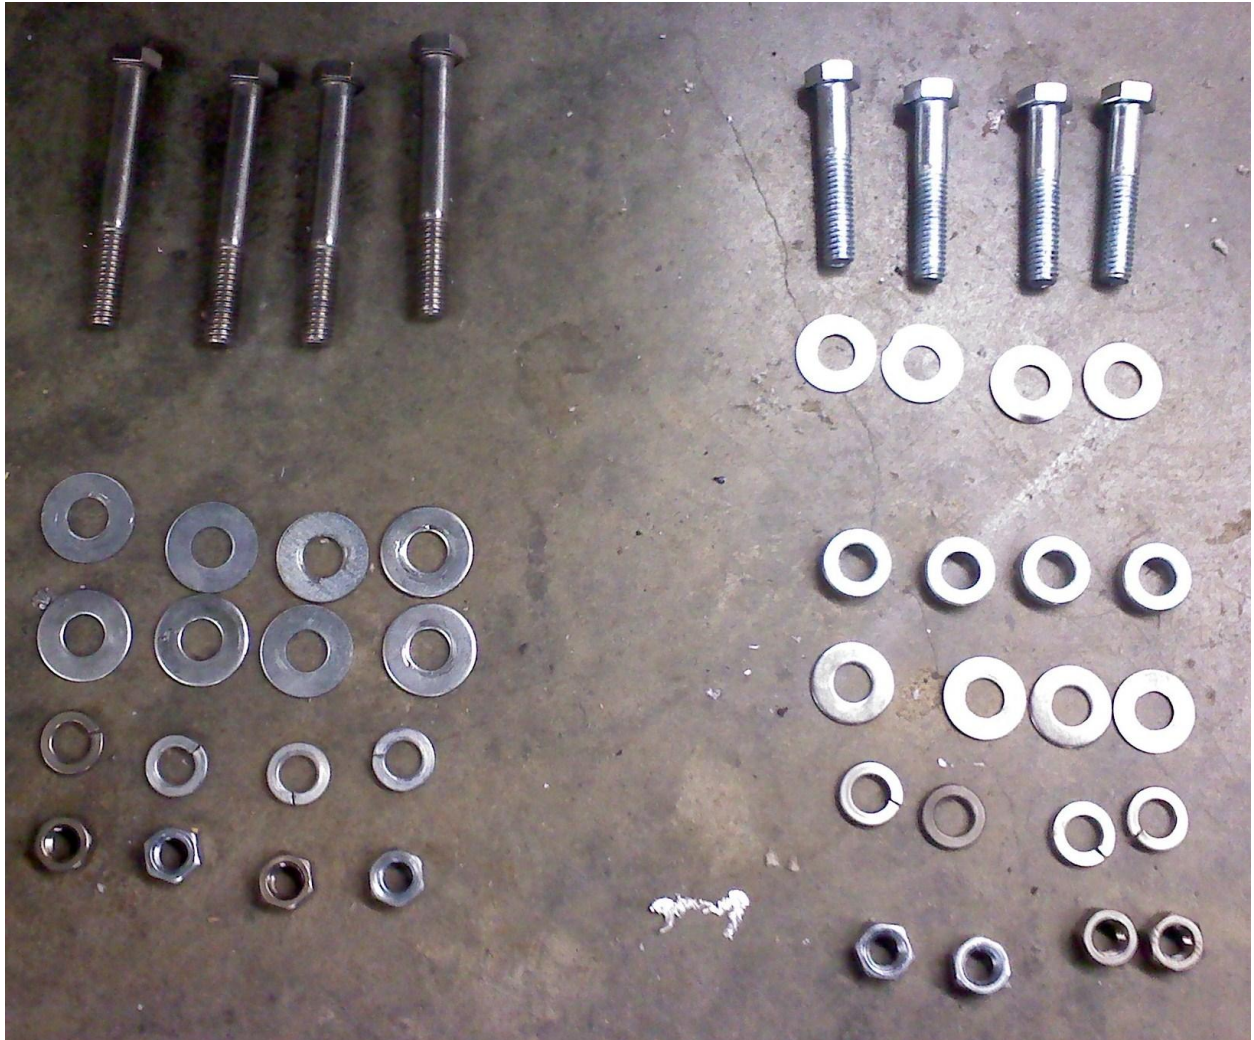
Bolts, washers, and nuts used to mount the aluminum block (left) and motor (right)
